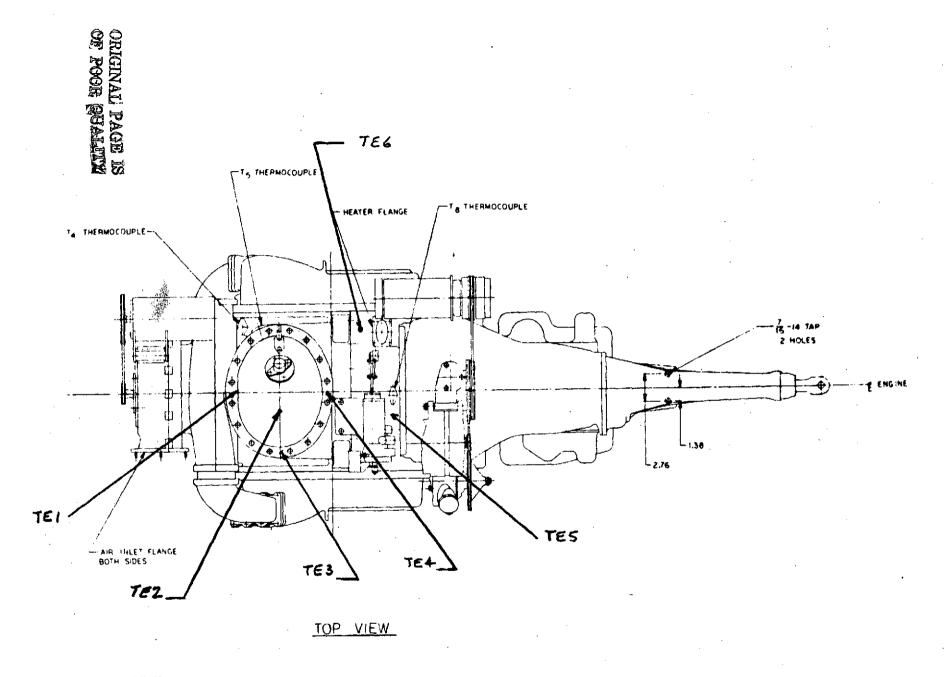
TOP VIEW OF ENGINE SHOWING THERMOCOUPLE LOCATIONS.
